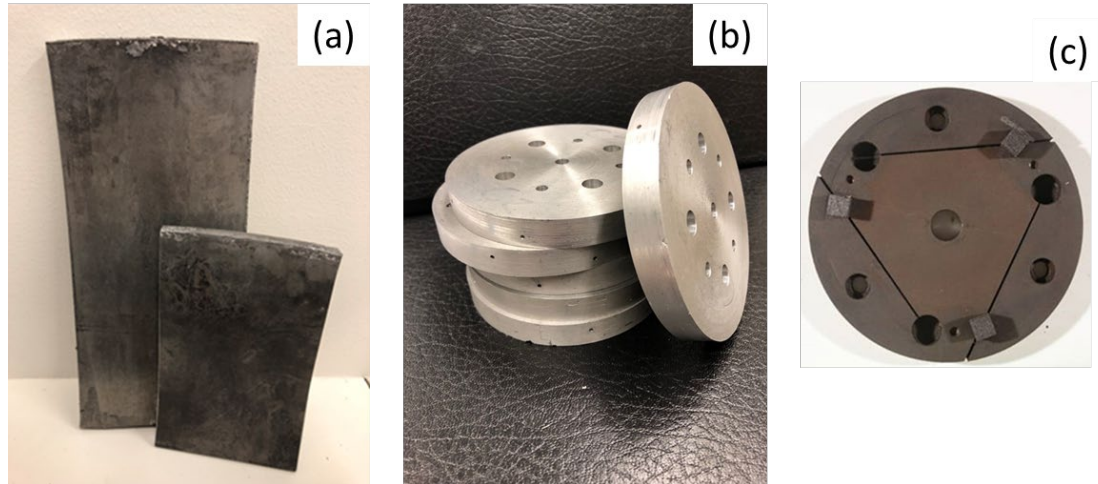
(a) Gravity cast plates of 5, 10, and 15 vol.% TiB₂ reinforced A356 alloy. (b) Sub-scale rotors ready for friction/wear testing. (c) Machined pad samples fitted in the pad holder. Source: PNNL.
